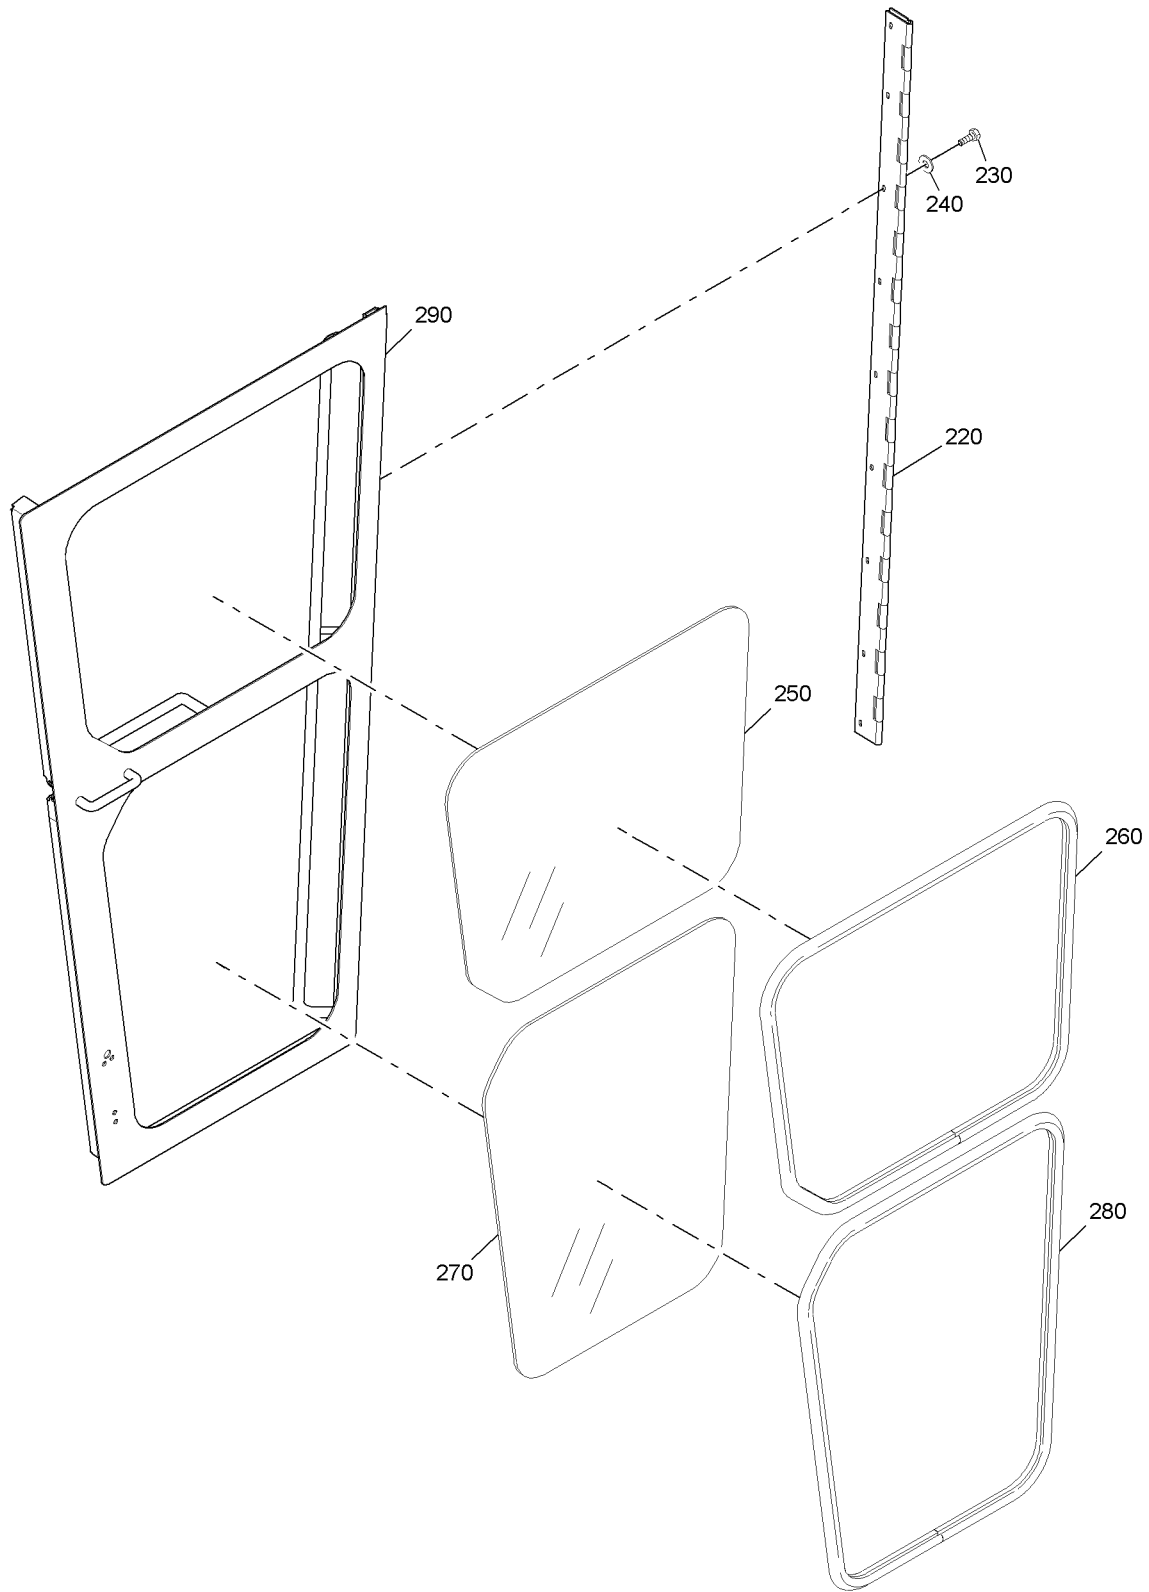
LEFT-HAND DOOR ASSEMBLY (SHEET 2 OF 2)
